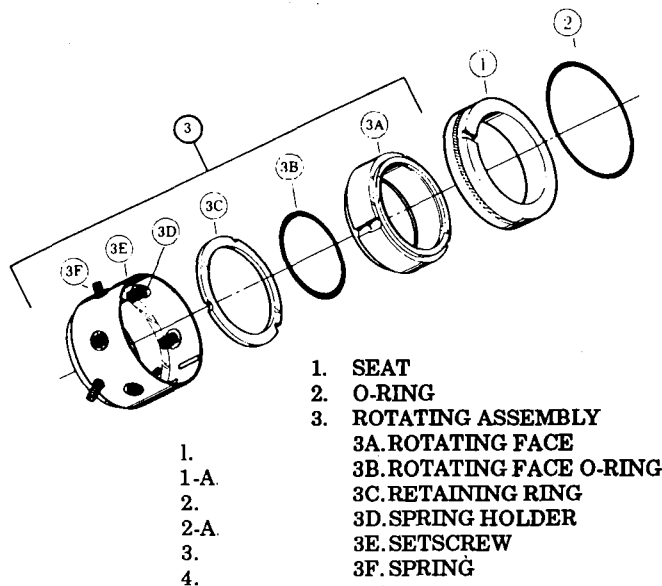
This figure is generally representative of the crane type 8-1 and Borg Warner Type Q mechanical seal.
